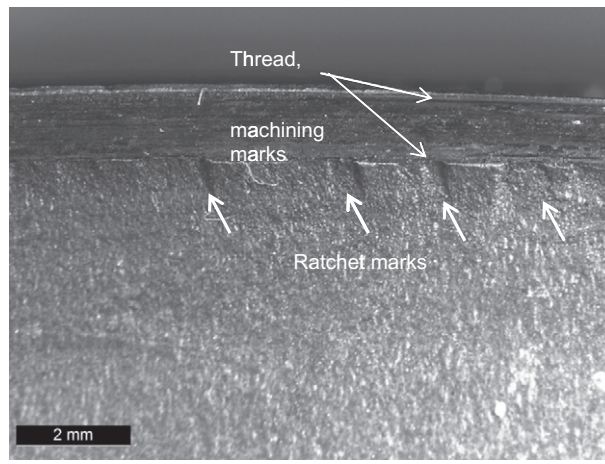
Fracture surface of secondary crack in casing (Fig. 3).
